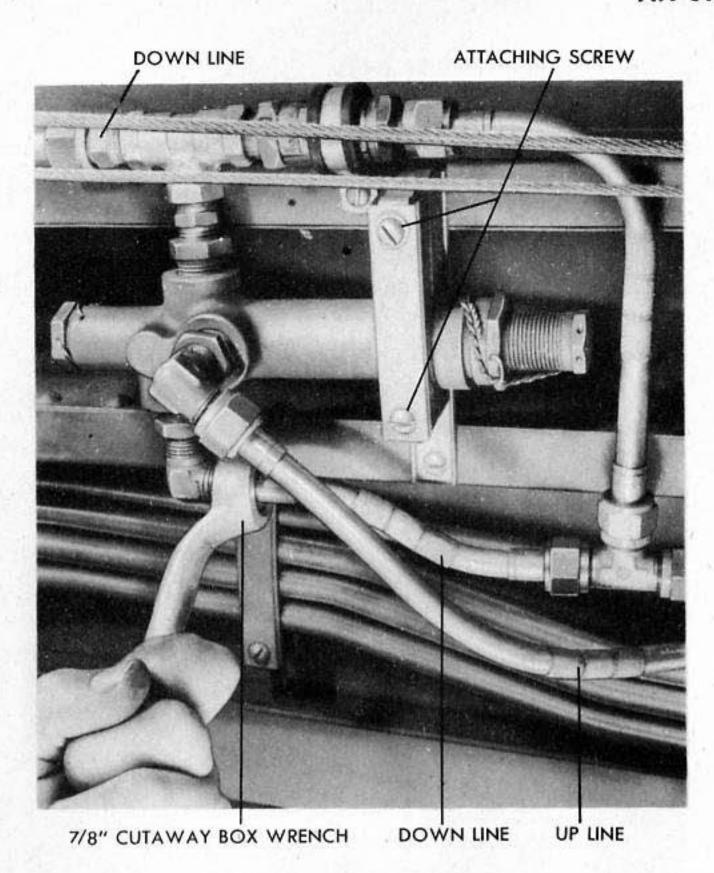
REMOVING WING FLAP RELIEF VALVE
